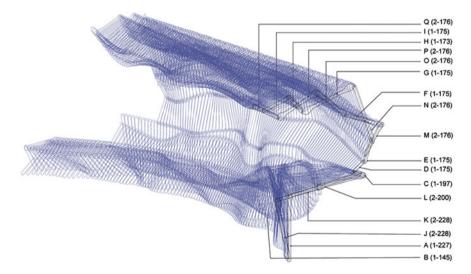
Indexing of Concierge desk for assembly. Credit Image by LLDS
